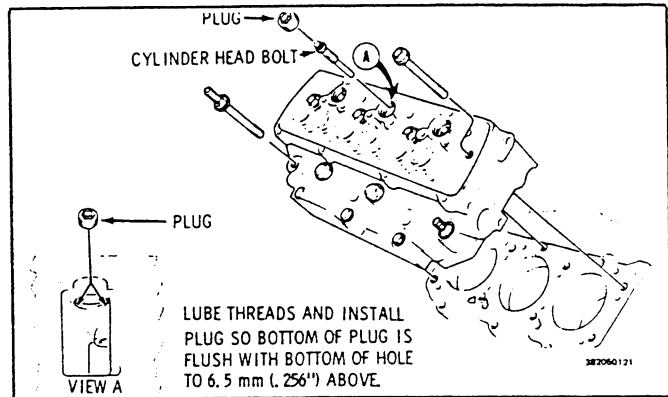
Cylinder Head Bolts and Pipe Plugs
